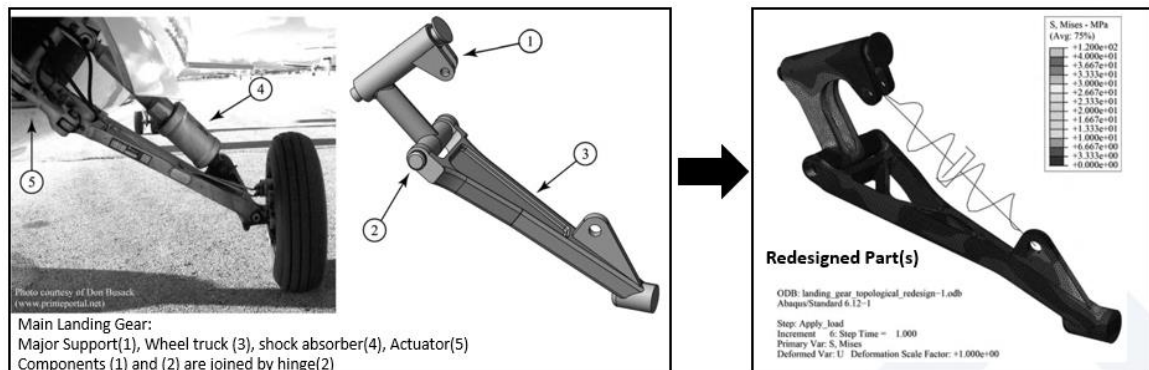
Landing Gear redesigned for High Pressure Die Casting, 5-Axis Machining, and PBF-LB/M to study the economies of scale [15].
